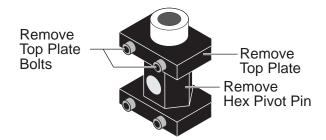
Removing the Top Plate and Hex Pivot Pin
